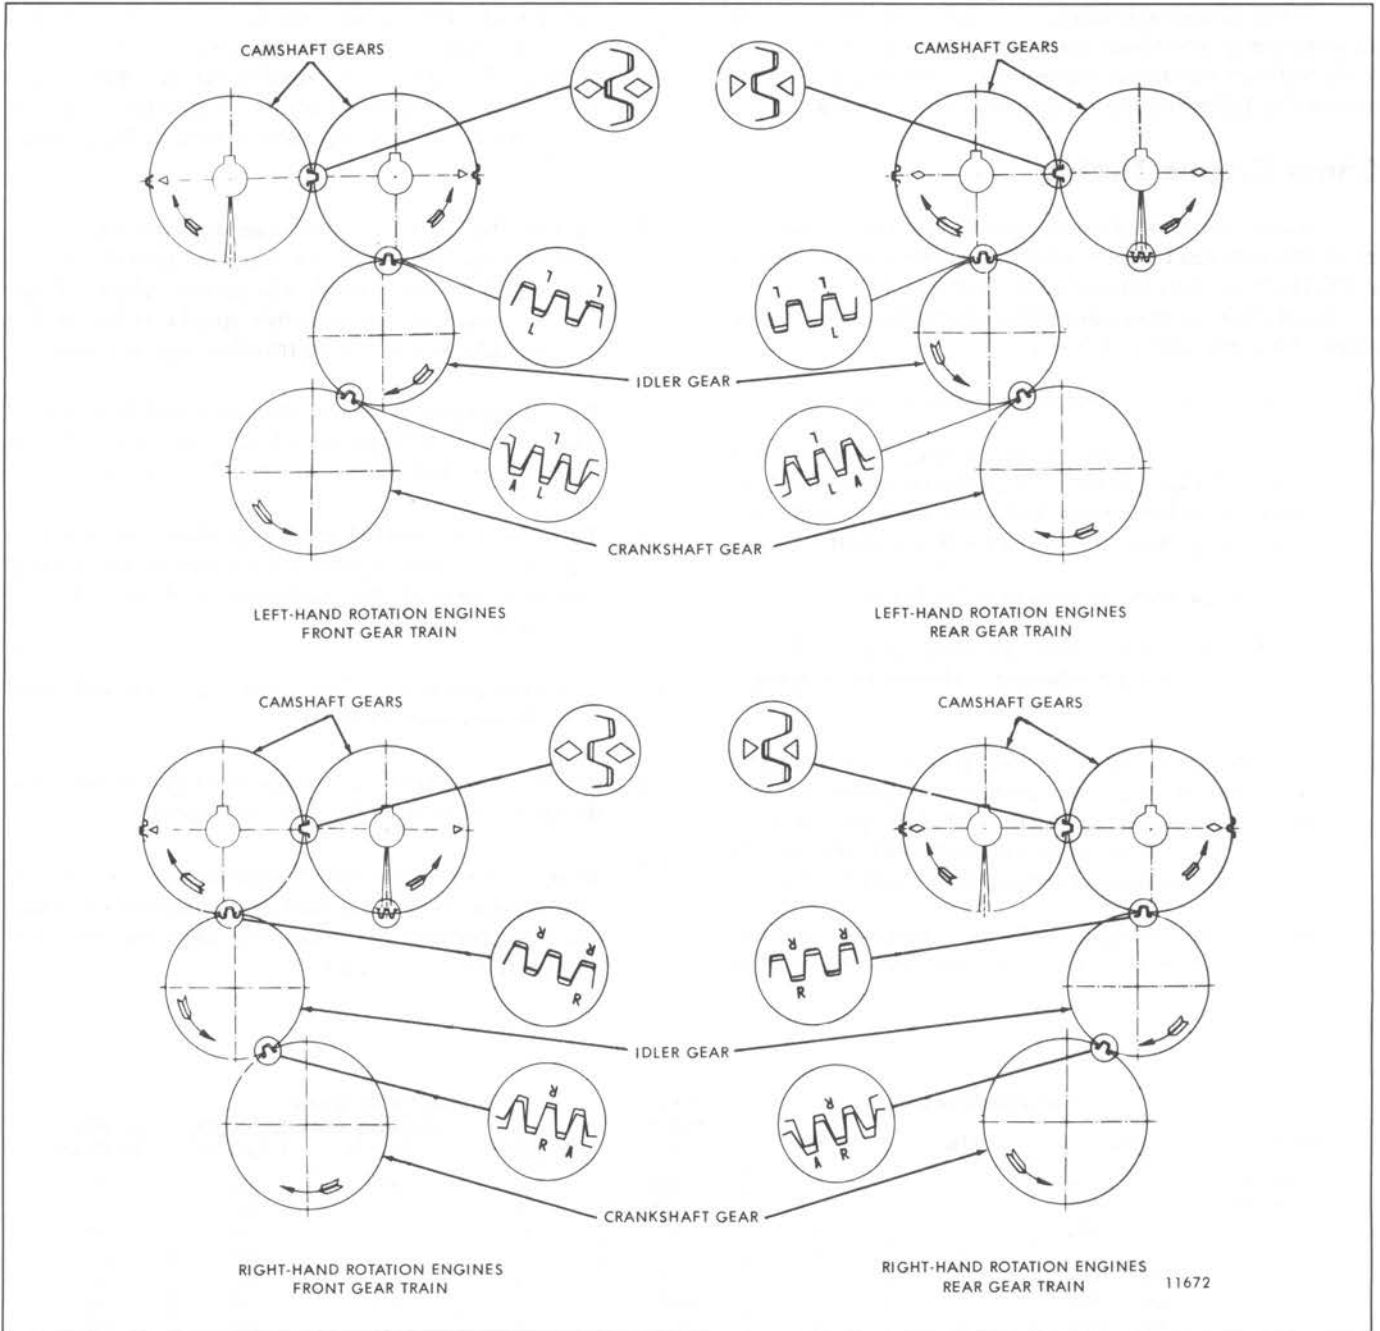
Gear Train and Timing Marks for 12V and 16V Engines
